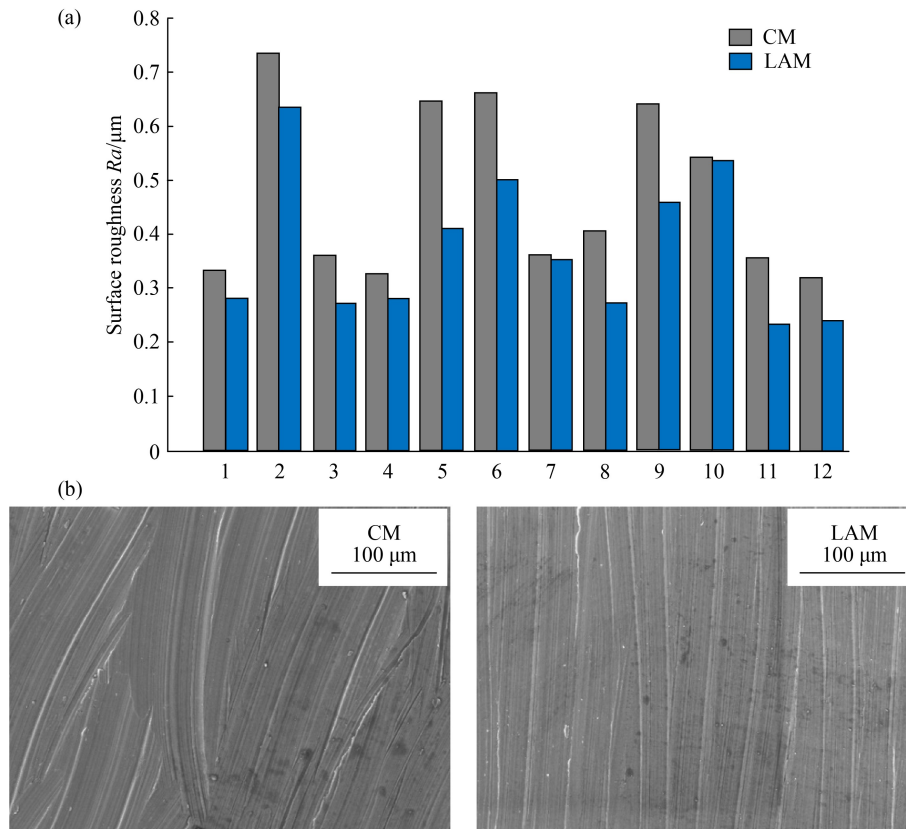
Conventional milling and laser-assisted milling (LAM) machined surface: (a) surface roughness and (b) microstructure [139]. CM: conventional milling. Reproduced with permission from Ref. [139] from MDPI.
